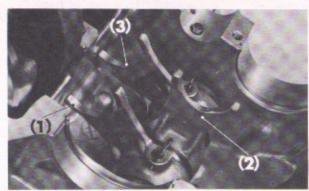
(1) Right gear shift fork (2) Center gear shift fork
